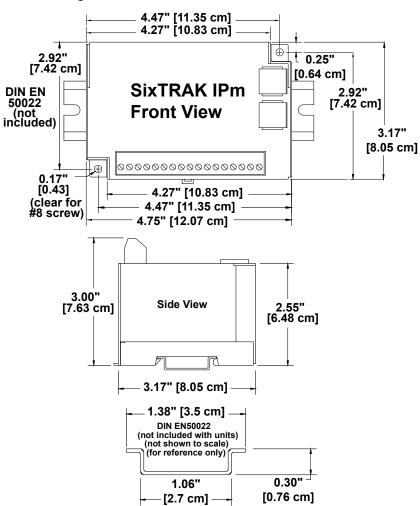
SixTRAK IPm RTU/Controller Dimensions:
